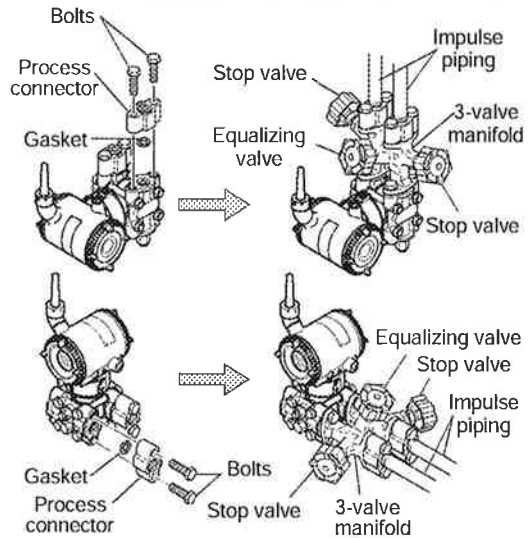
3-Valve Manifold (Direct-Mounting Type)
